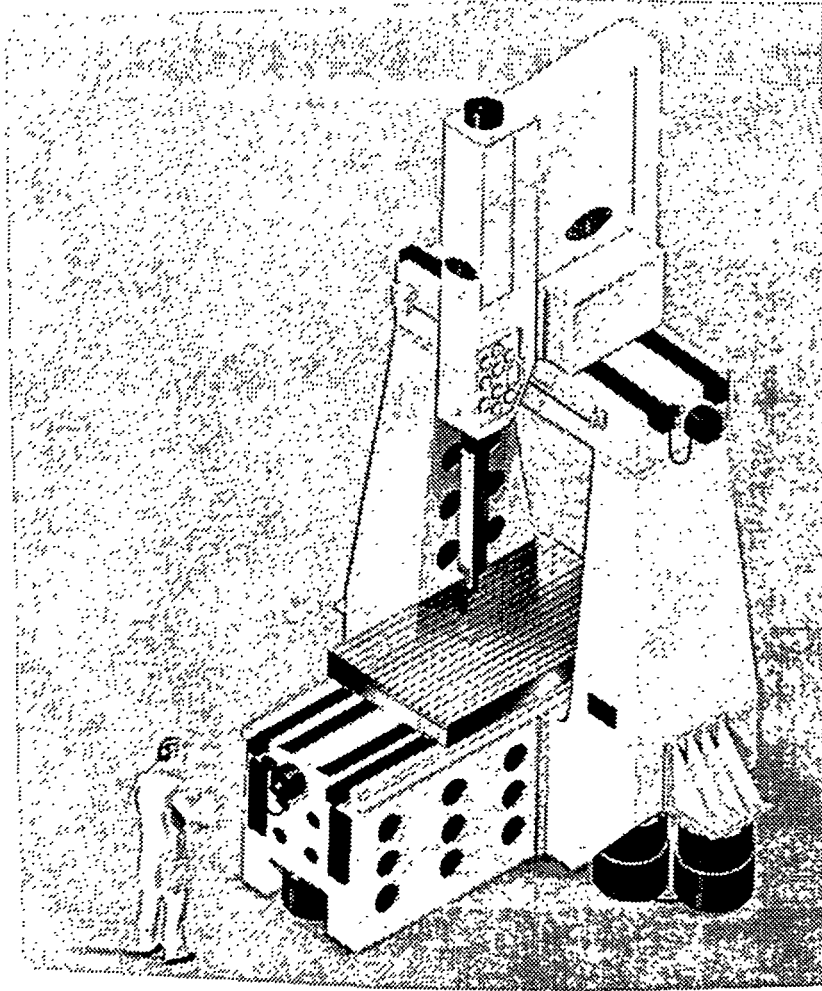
MOORE M-60 CNC Universal Coordinate Measuring Machine
